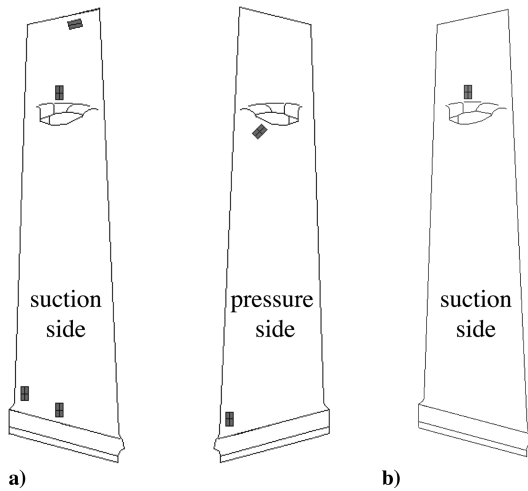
Strain gauge locations on tested blades: a) wheel 1, and b) wheel 2.
